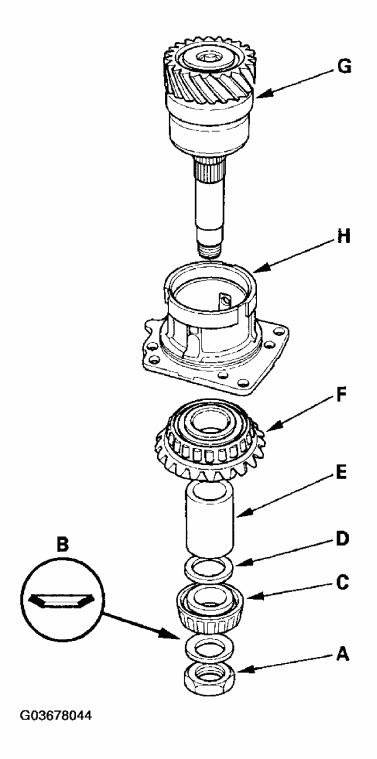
Removing Locknut, Conical Spring Washer, Tapered Roller Bearing, Thrust Shim, Transfer Shaft Collar, Transfer Drive Gear, And Transfer Shaft Assembly From The Transfer Holder Courtesy of AMERICAN HONDA MOTOR CO., INC.
